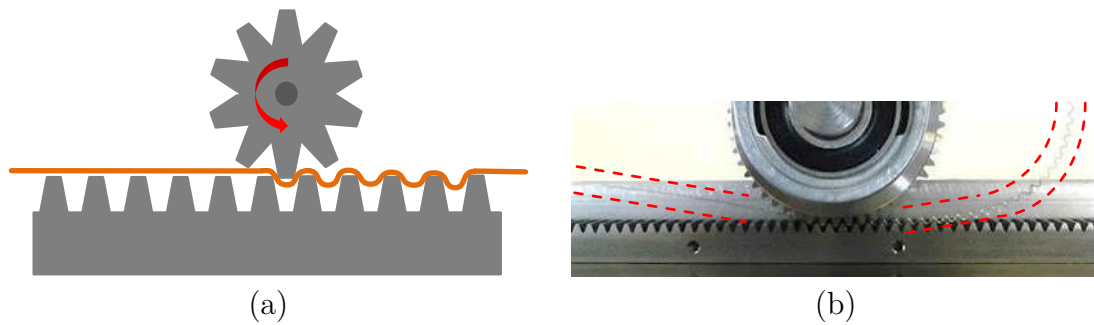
Wave-shaping with Method 2: (a) schematic drawing and (b) photograph of the wire deformation using one toothed rack and one toothed wheel. A bowing of the resulting wave-shaped wire is visible.
